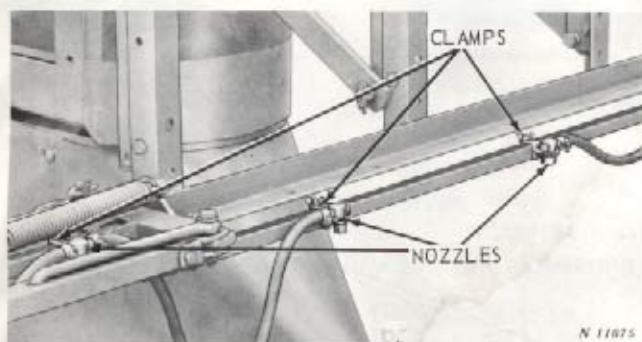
Nozzles Clamped To Dry-Type Boom
